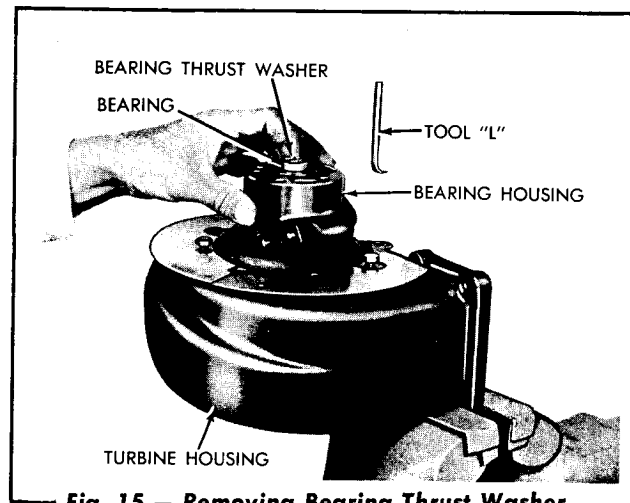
Removing Bearing Thrust Washer and Bearing
